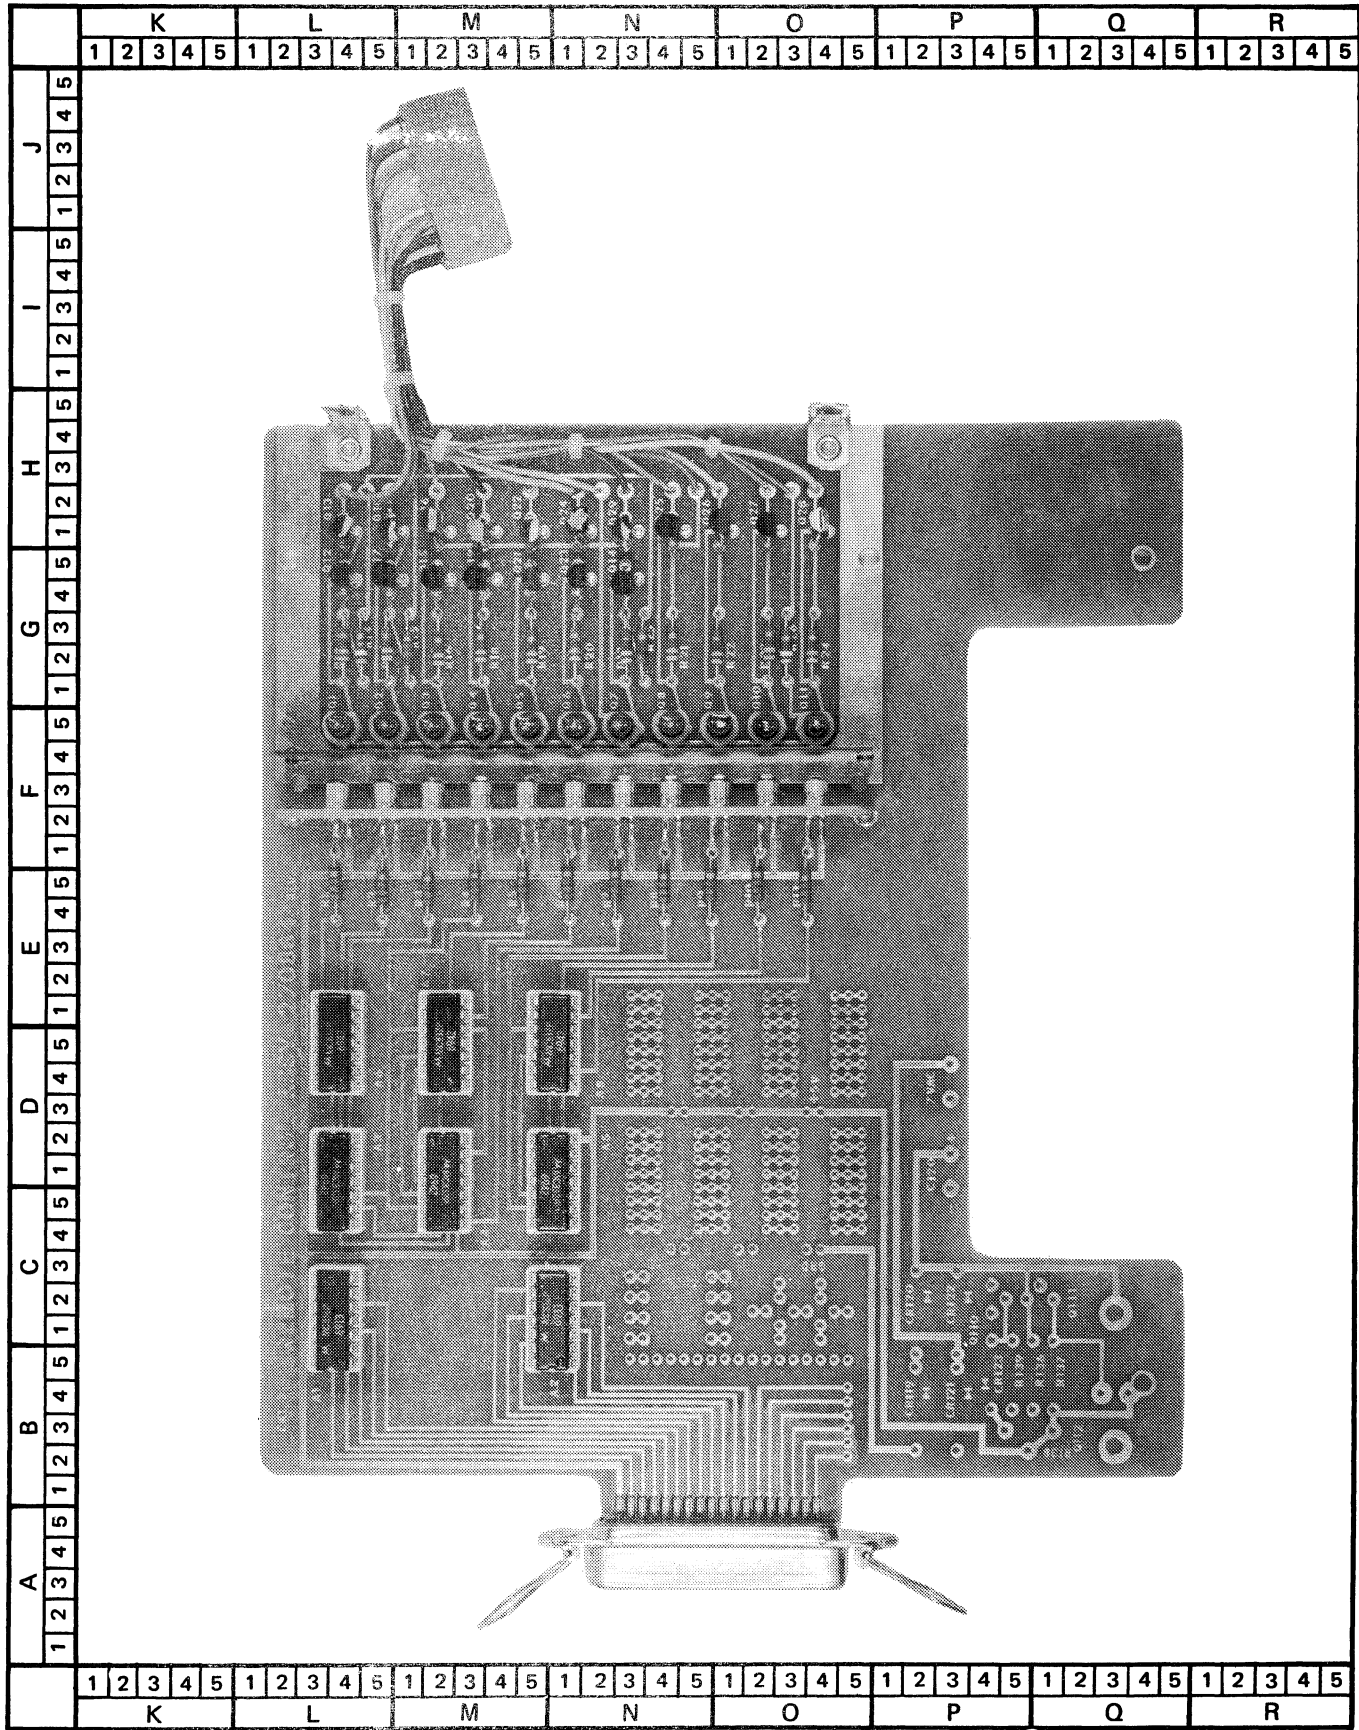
REMOTE CONTROL P/C ASSEMBLY
